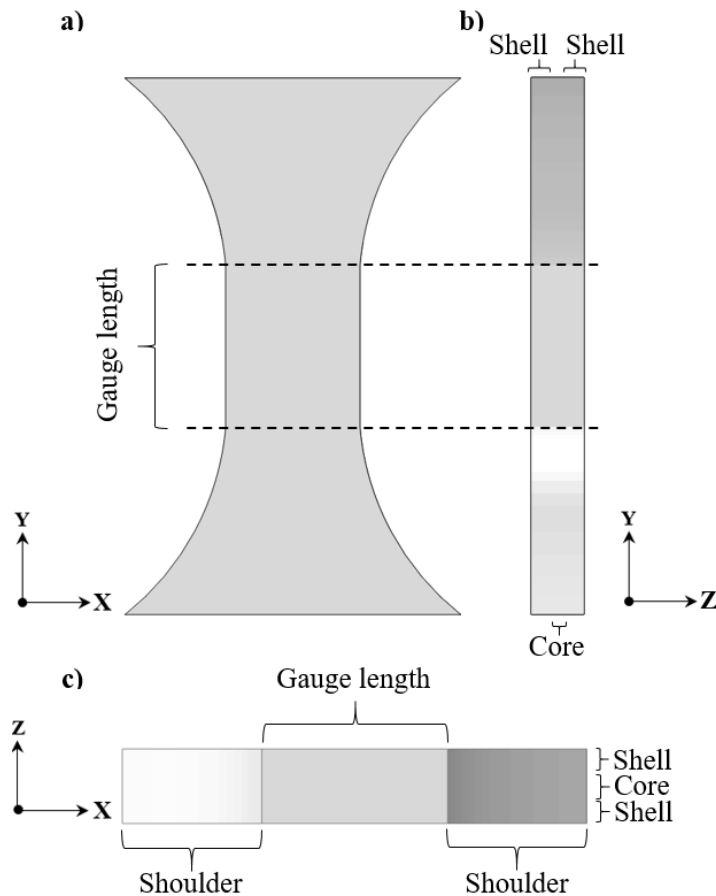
Schematic of the specimen's view. a) front view, b) lateral view (thickness), c) cross-section cut
